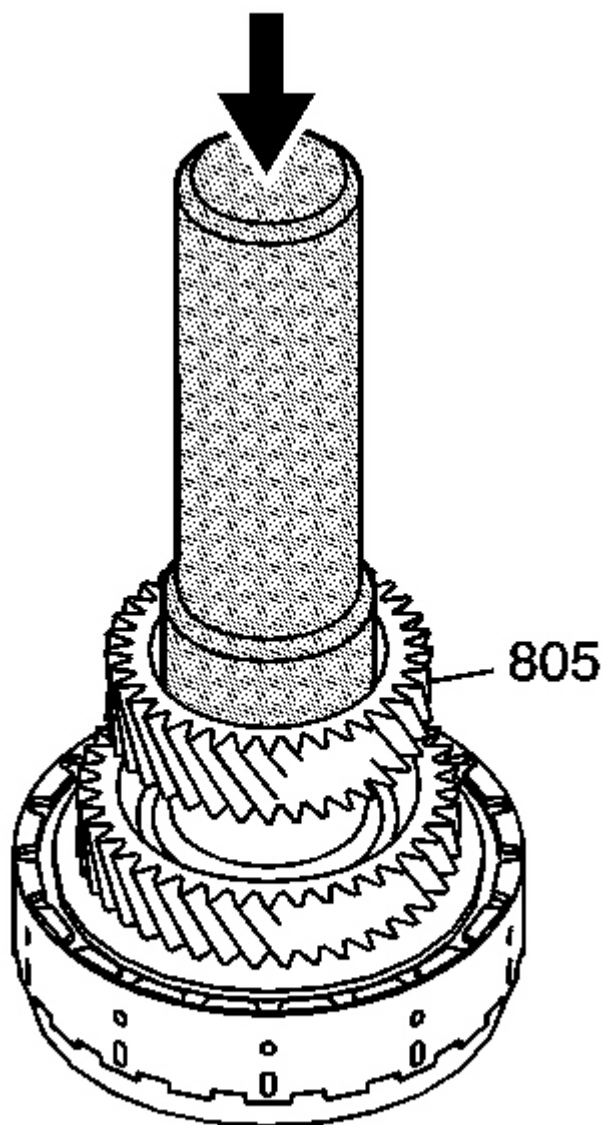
Installing 3rd Driven Gear Using DT 46509 And A Hydraulic Press
